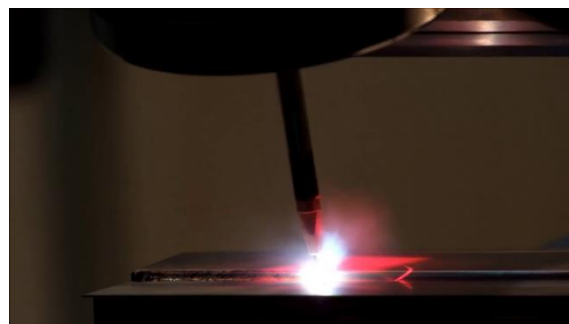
Coaxial laser brazing of a flanged seam using a CuSi3 wire
